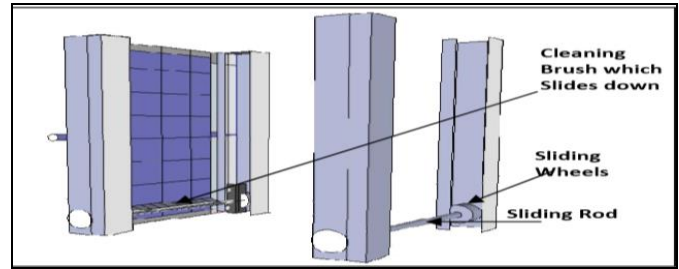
Sliding rod and wheels arrangement for cleaning mechanism
